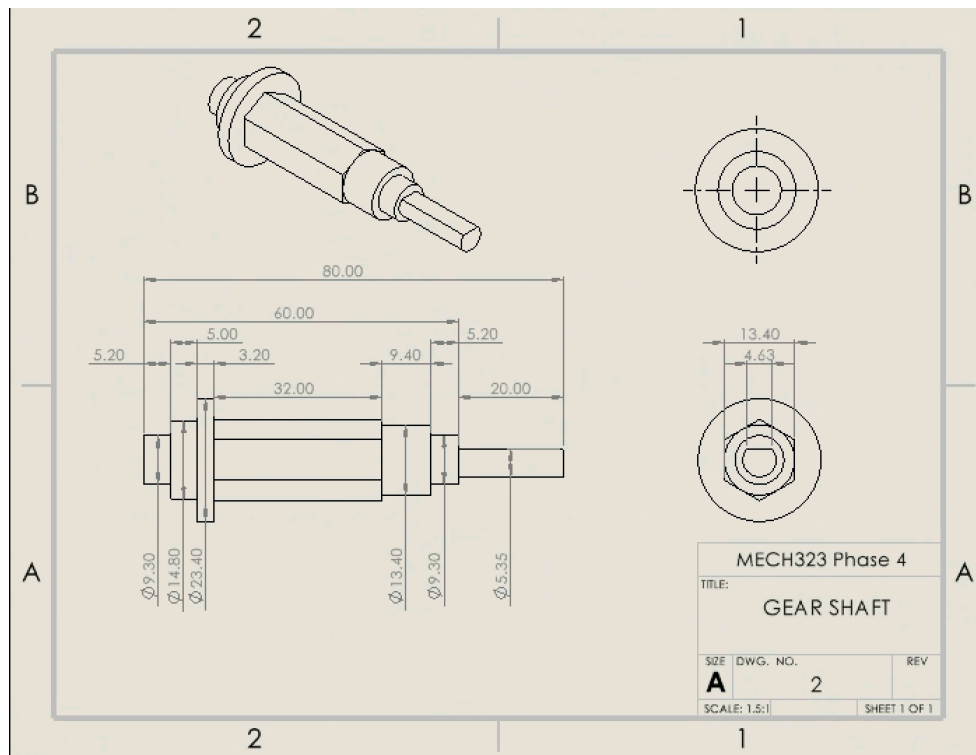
Fully dimensioned drawing of the gear shaft. Drawing includes the front, back and right views, as well as an isometric view of the part.
